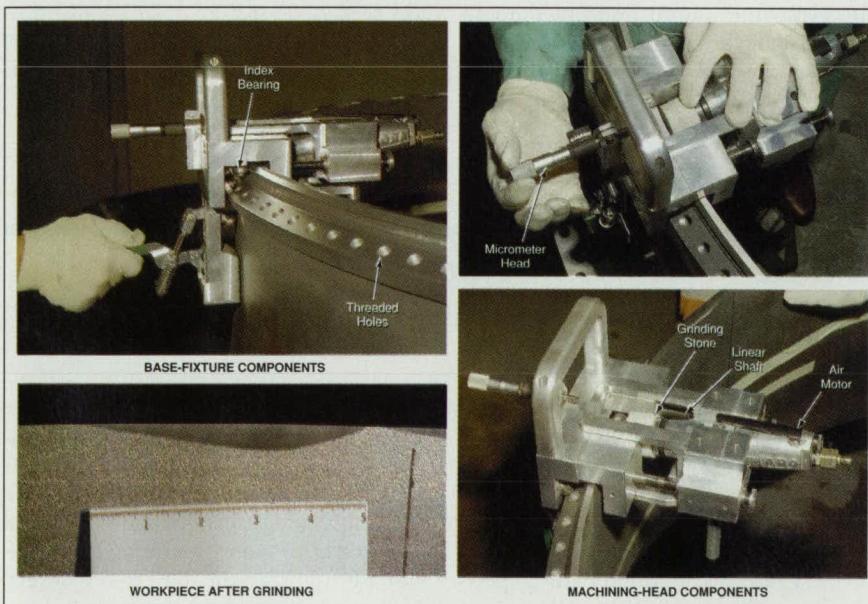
The Grinding Tool and Fixtures make the material-removal process faster, easier, and more controllable, in comparison with a formerly used manual filing process.
